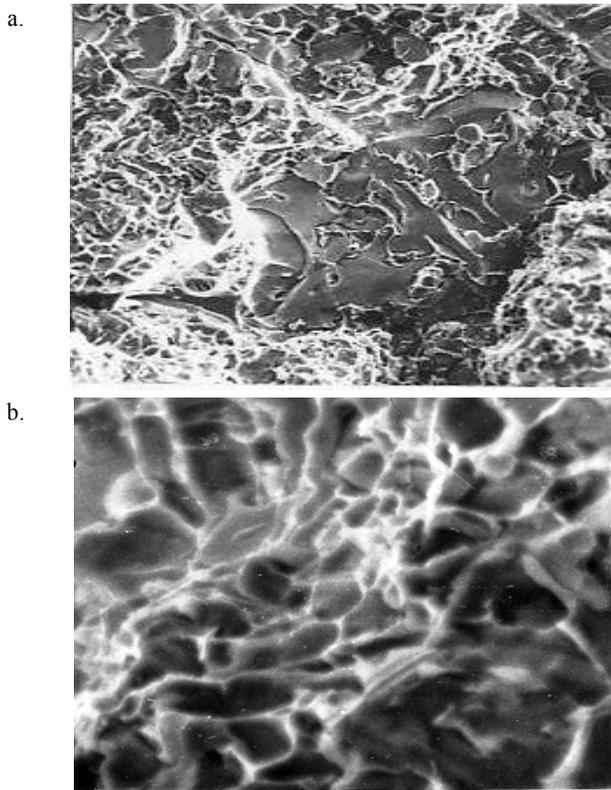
The fracture surface of impact tested specimens No 8 taken at different magnification: a – x1000 and b – x5000
